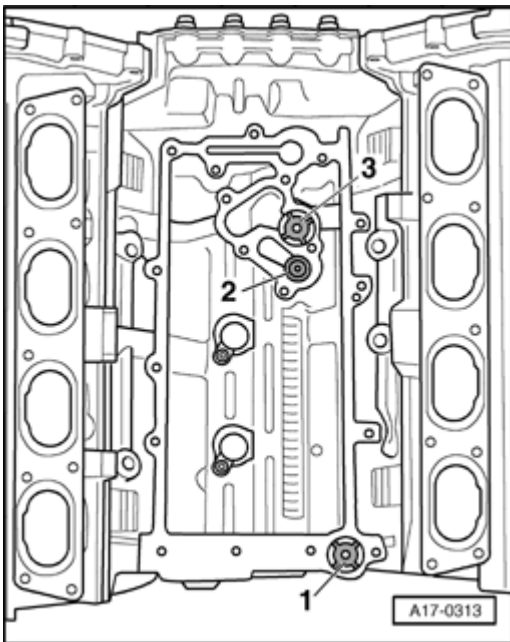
Removing Oil Check Valves & Spray Nozzle Valve
